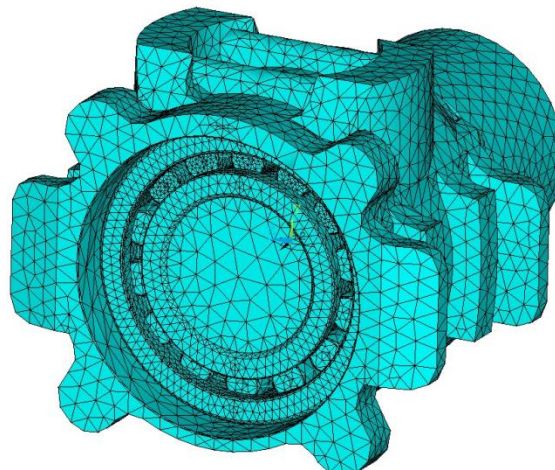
Finite element model of an axle box bearing assembly with a double cylindrical bearing
